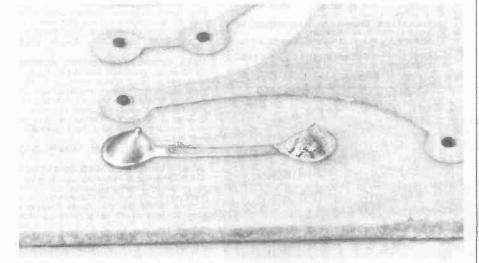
Photo of two soldered joints. The one at left is shiny indicating a good joint. At right, is a "cold" solder joint.
